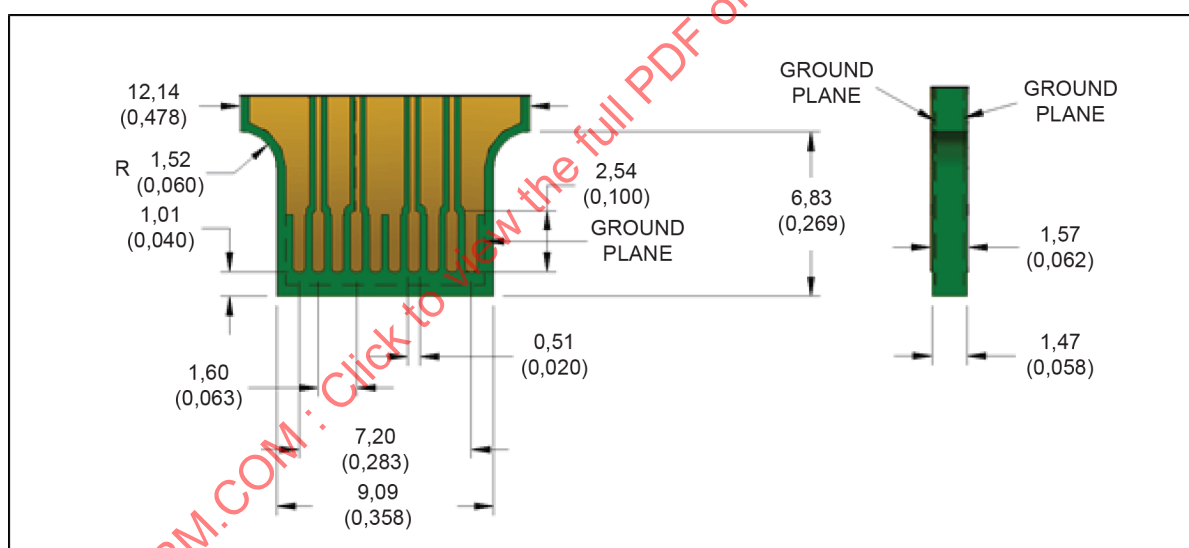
Balunless fixture PCB paddle card interface mating dimensions
